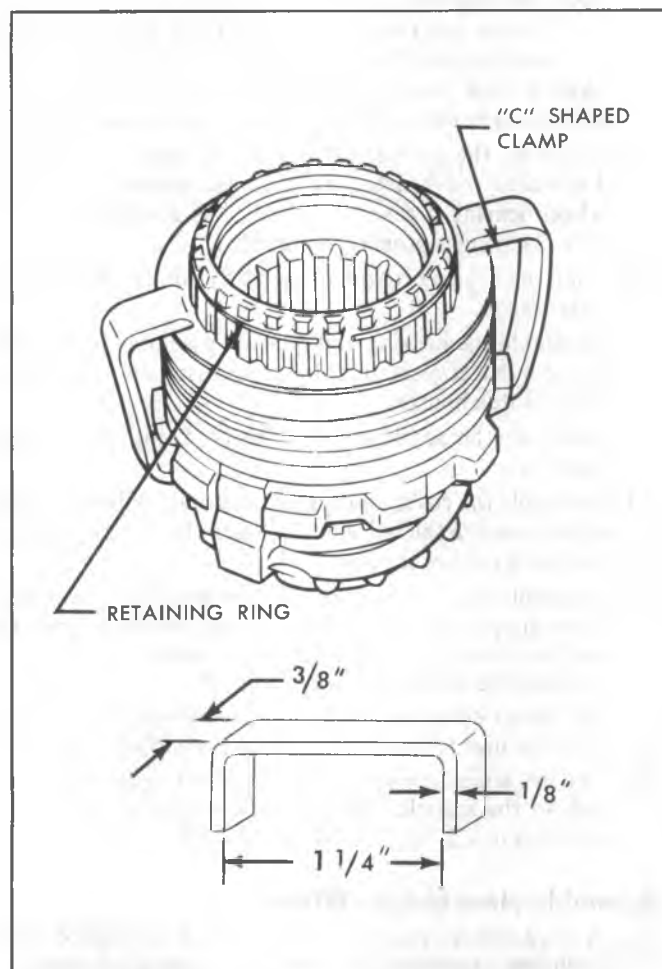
C-4K--Using Clamp and Vise to Compress Return Spring
